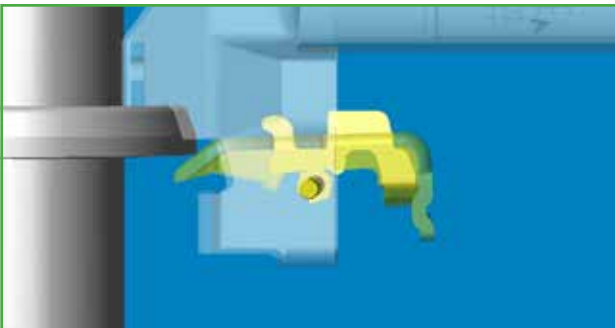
Wedge Retainer without Plastic Tube (Contacting Ring)
